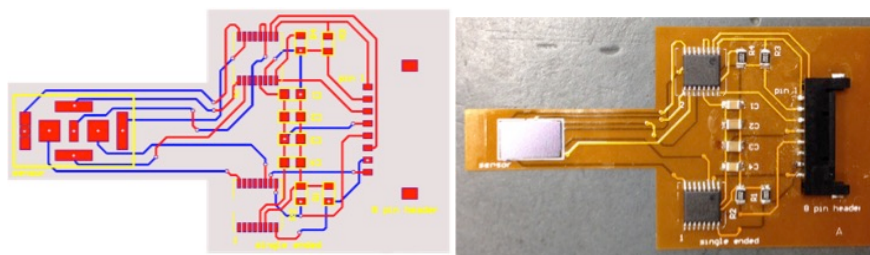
(left)PCB layout for single-sided sensor (right) real object after soldering components
